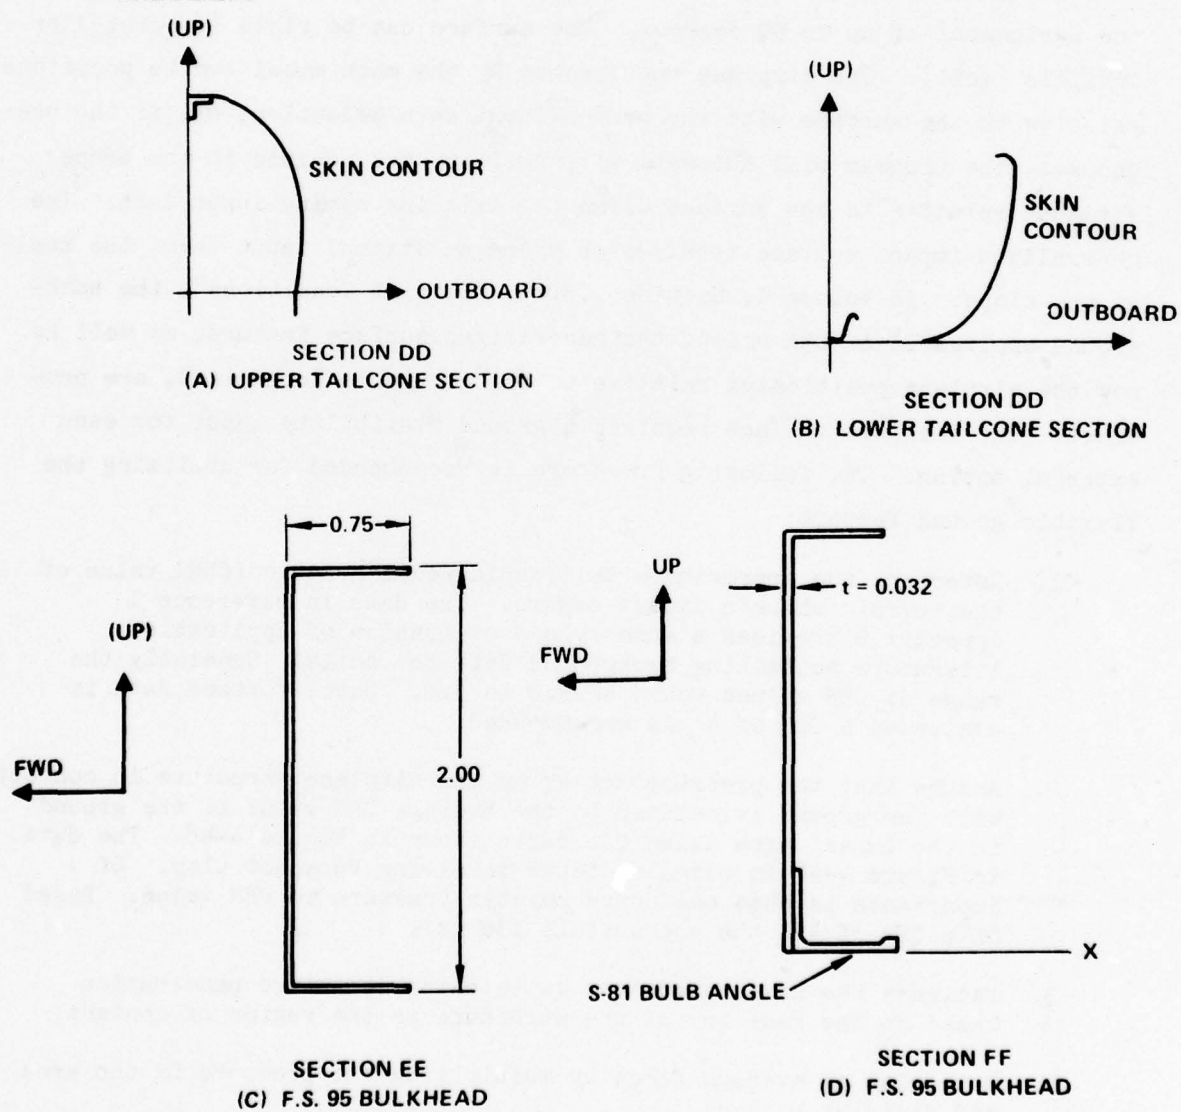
Tail Cone and F.S. 95 Bulkhead Structure Cross Sections
